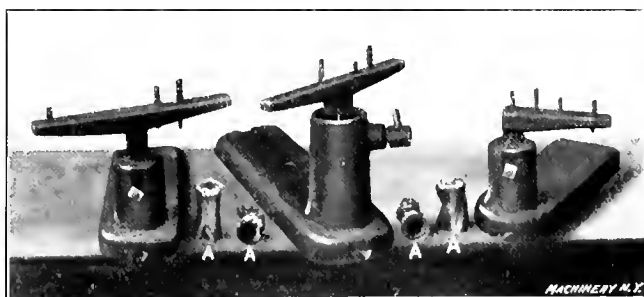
Burnishing Lathe Steady-rests and Finger Pads
